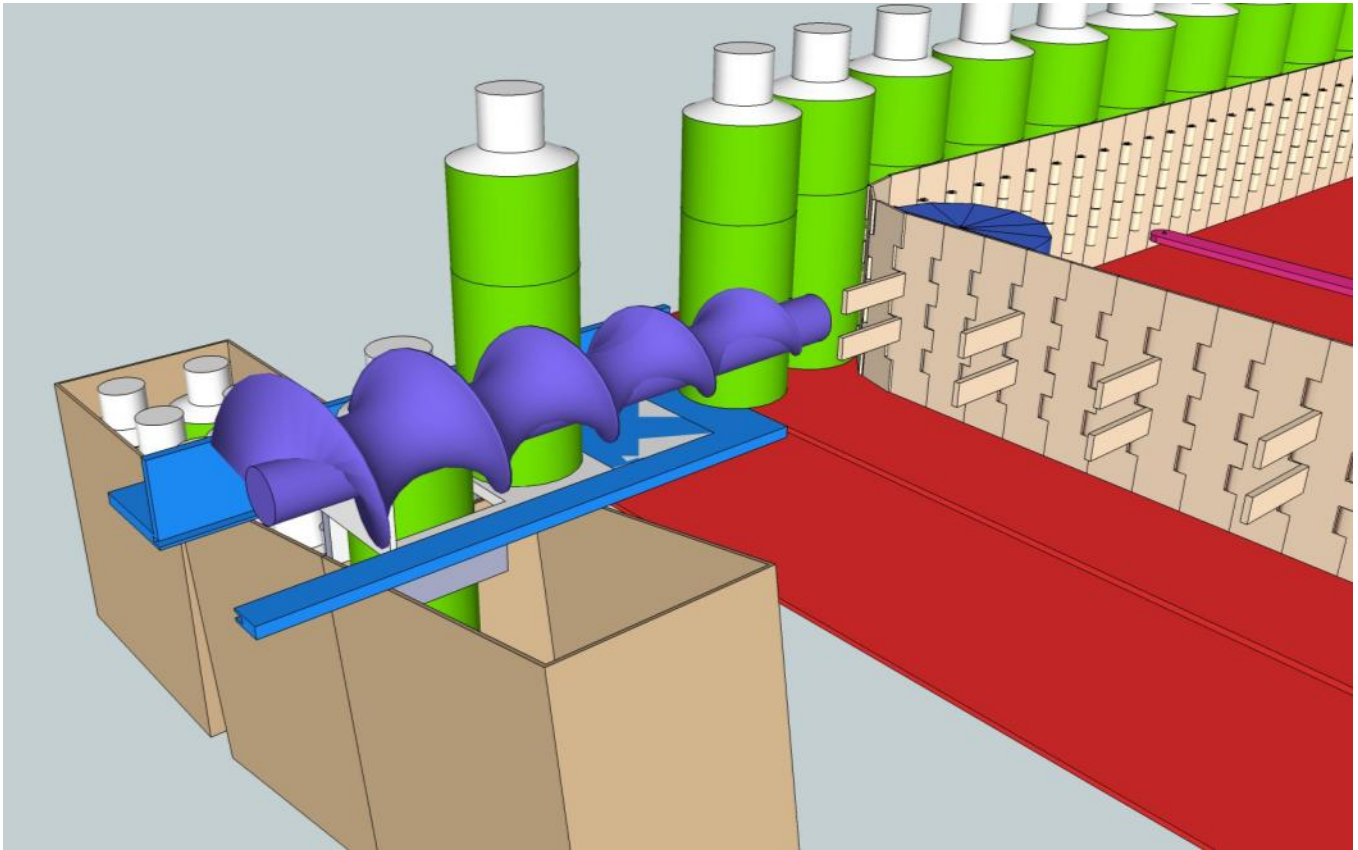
FlowPacker Bottle Case Packer – Top View
